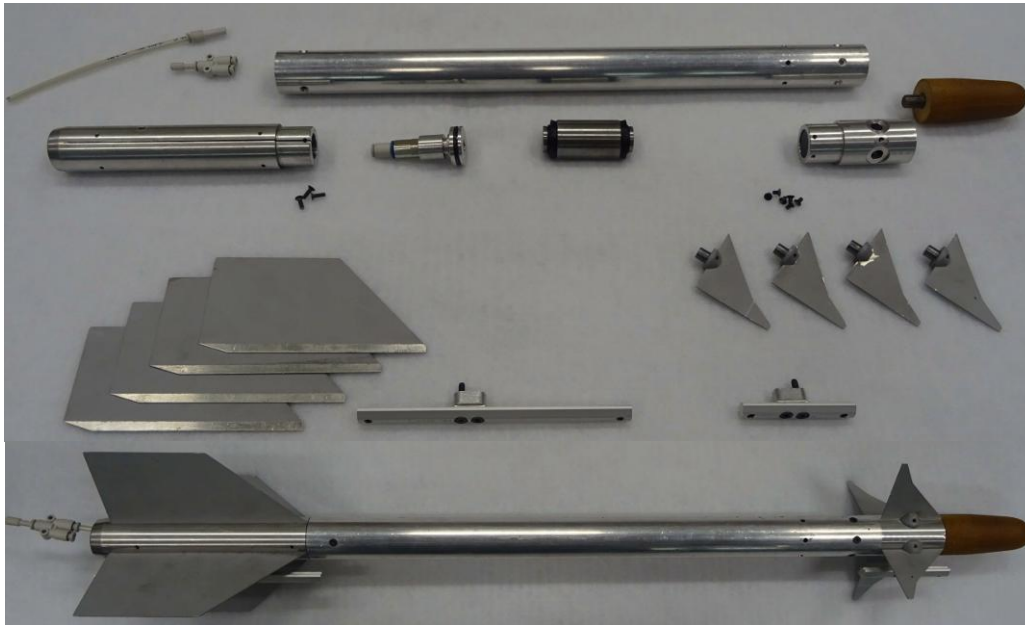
Wing tip missile parts (upper picture) and assembled (lower picture).
